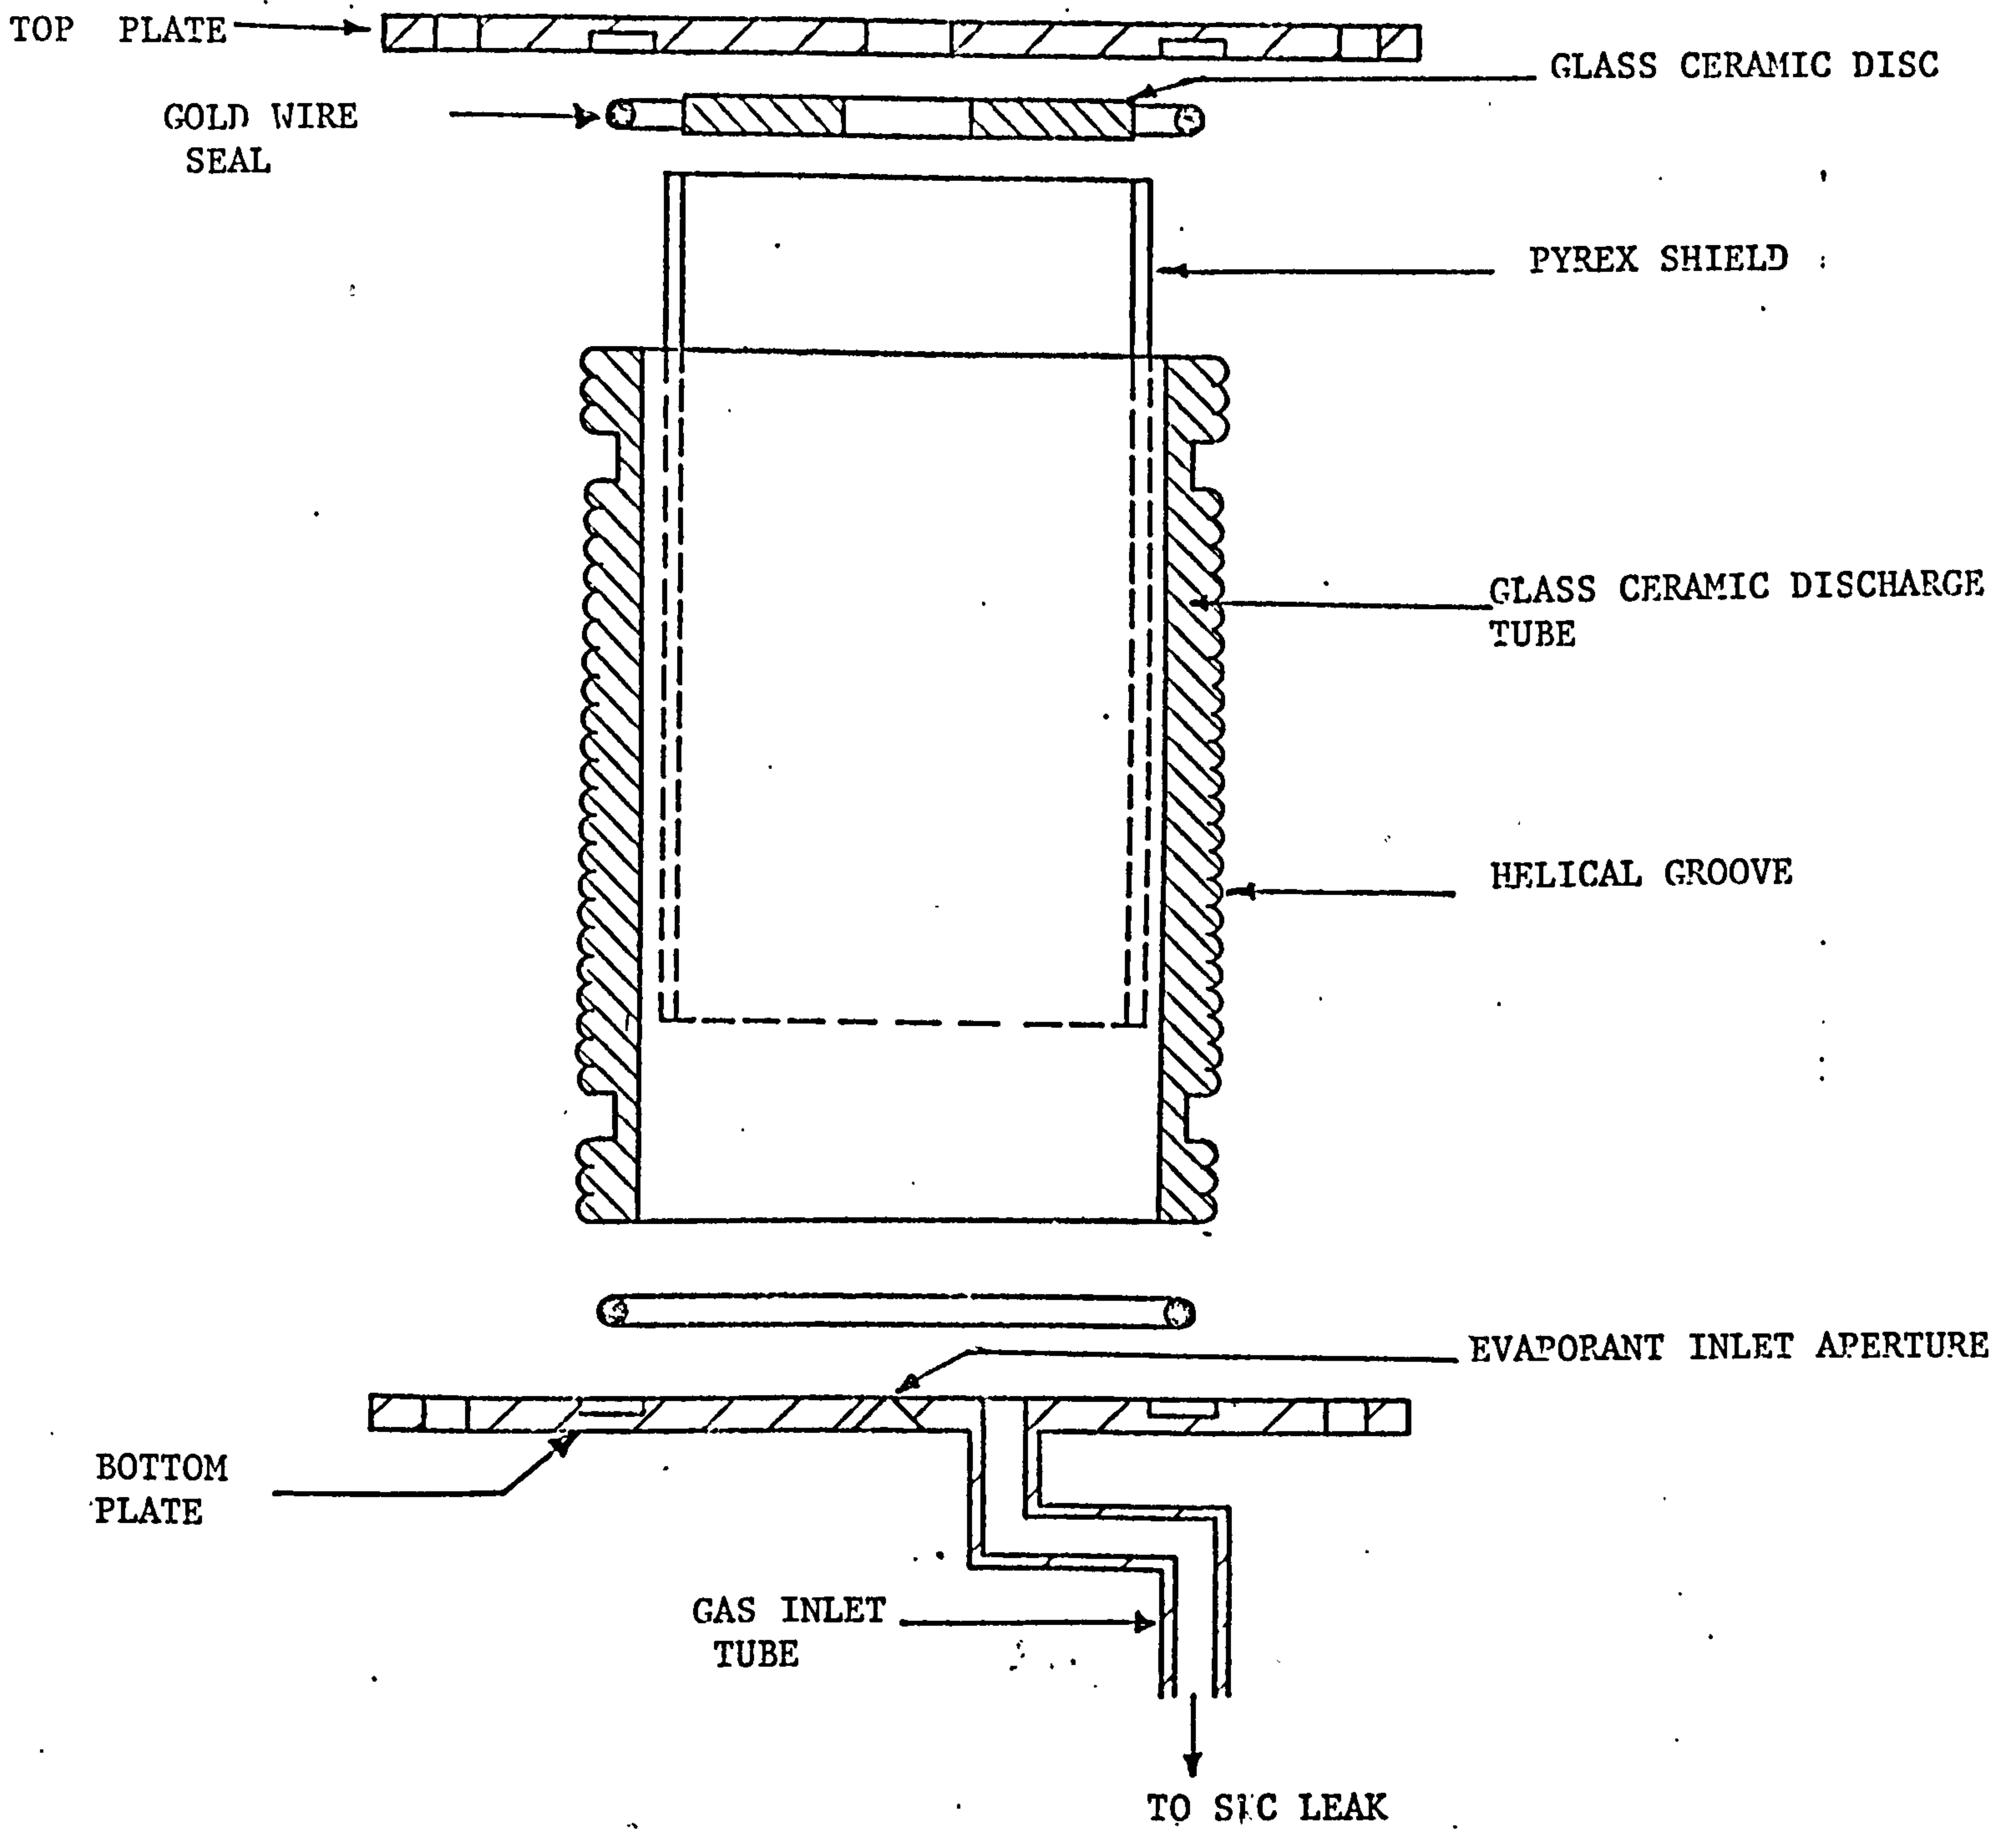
EXPLODED VIEW OF DISCHARGE CHAMBER
